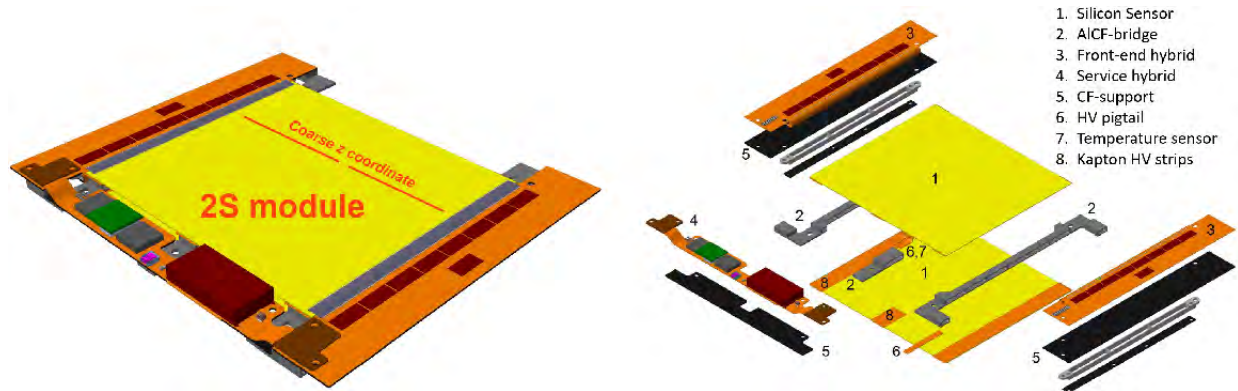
Assemble 2s module (left), exploded view of 2S Module(right).
